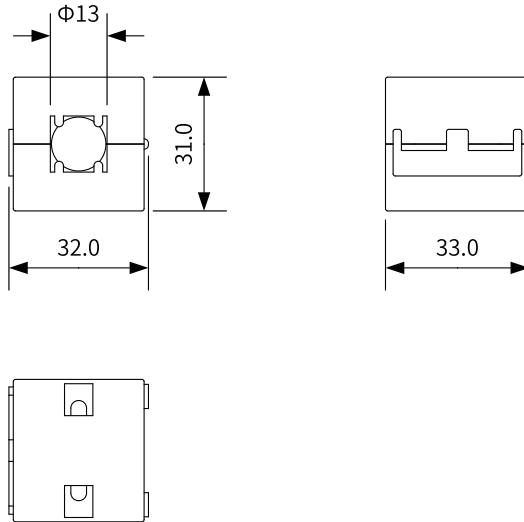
Dimensions of the ferrite clamp (unit: mm)
